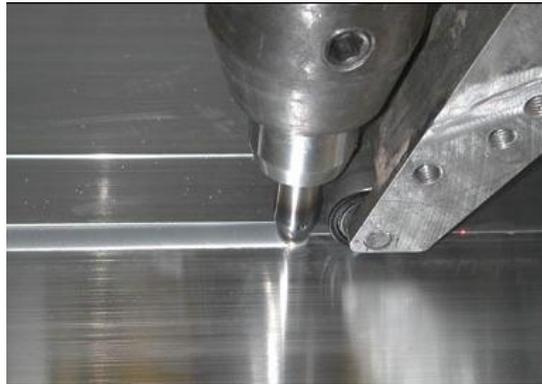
Example of the Friction Stir Weld in Process with rolling plate⁴
